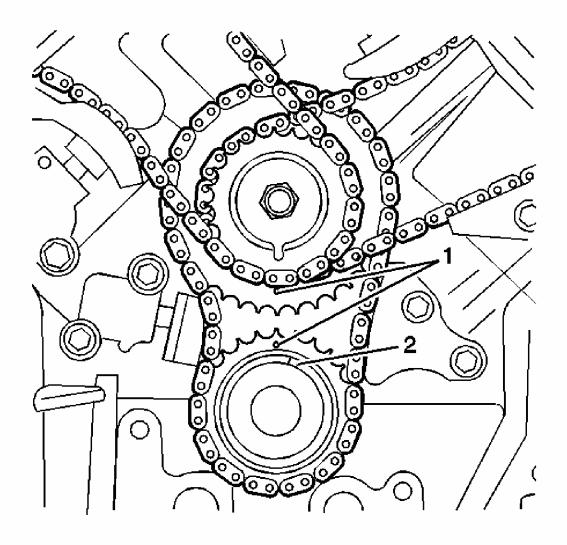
Identifying Primary Timing Gear Alignment Marks Courtesy of GENERAL MOTORS CORP.
